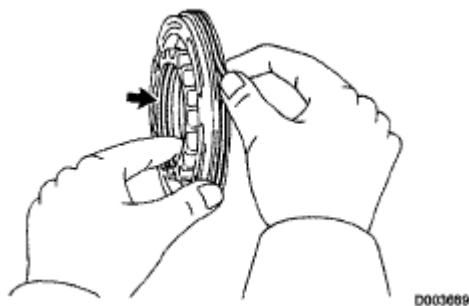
Installing Forward Clutch Piston Sub-Assembly
